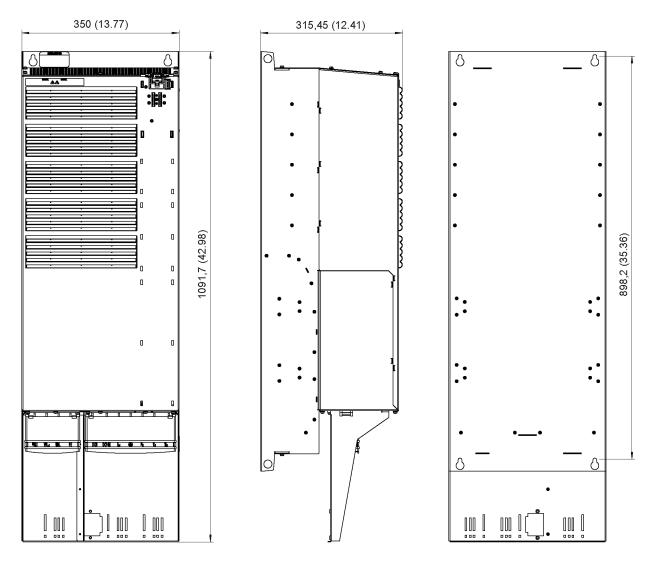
Dimension drawing, PM340 Power Module with screening kit, frame size FSF with integrated line filter, all dimensions in mm (inches)
